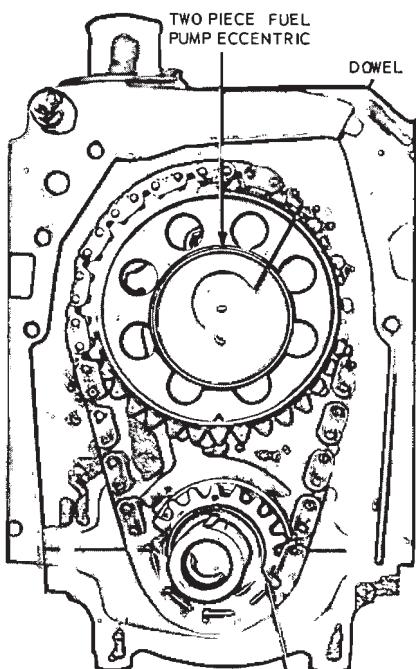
Fuel Pump Eccentric and Front Oil Slinger Installed
